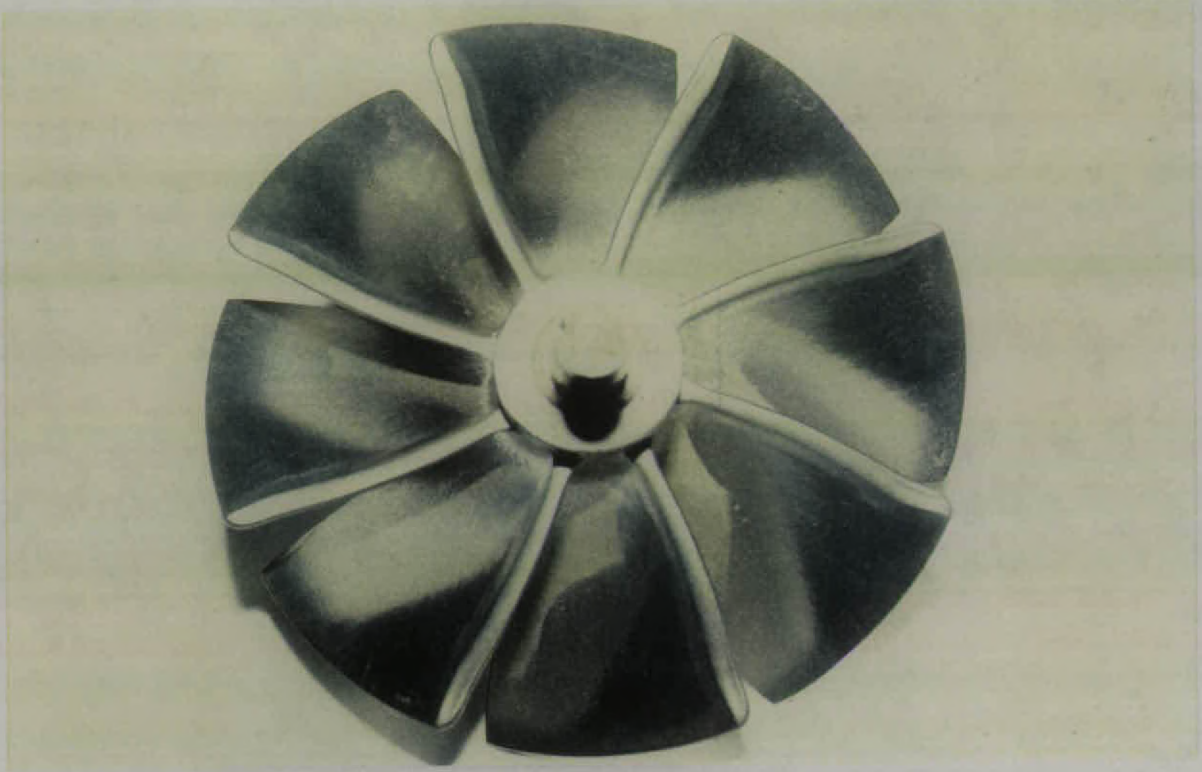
MANUFACTURER B. 100 mm DIAMETER METER, ROTOR BLADE WEAR
